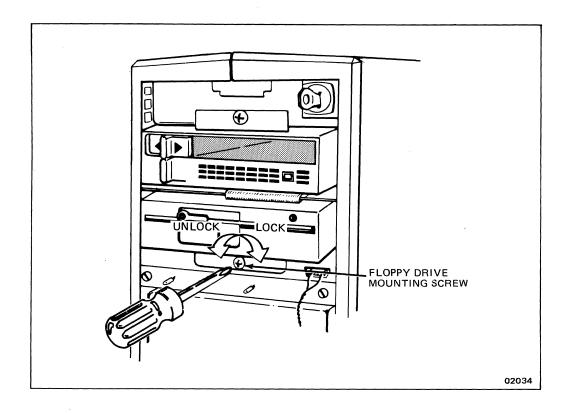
Locking/Unlocking the Floppy Drive Mounting Screw
